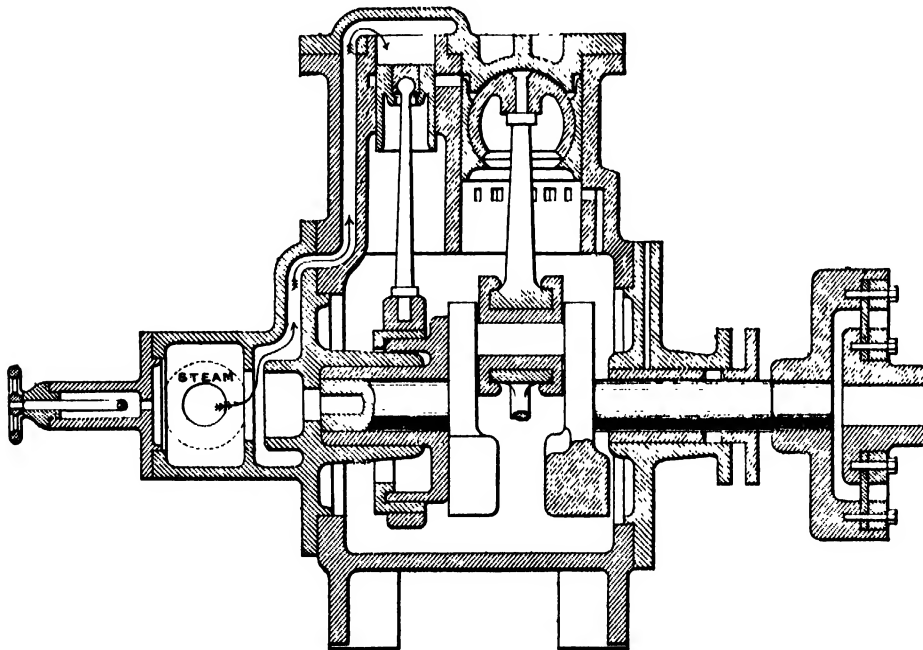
Brotherhood Engine. Side Section through Cylinder and Valve
